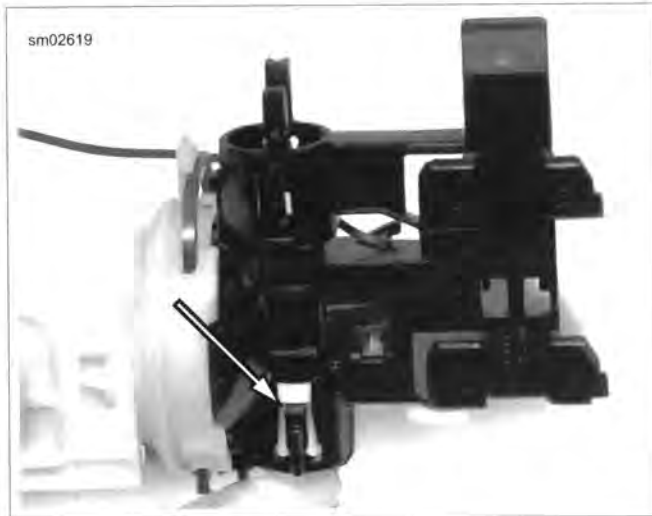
Fuel Pump Hose Retaining Clip (2)
